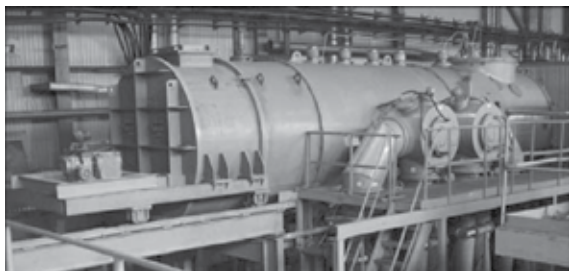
External appearance of the UE-5810 universal multipurpose electron-beam equipment.
